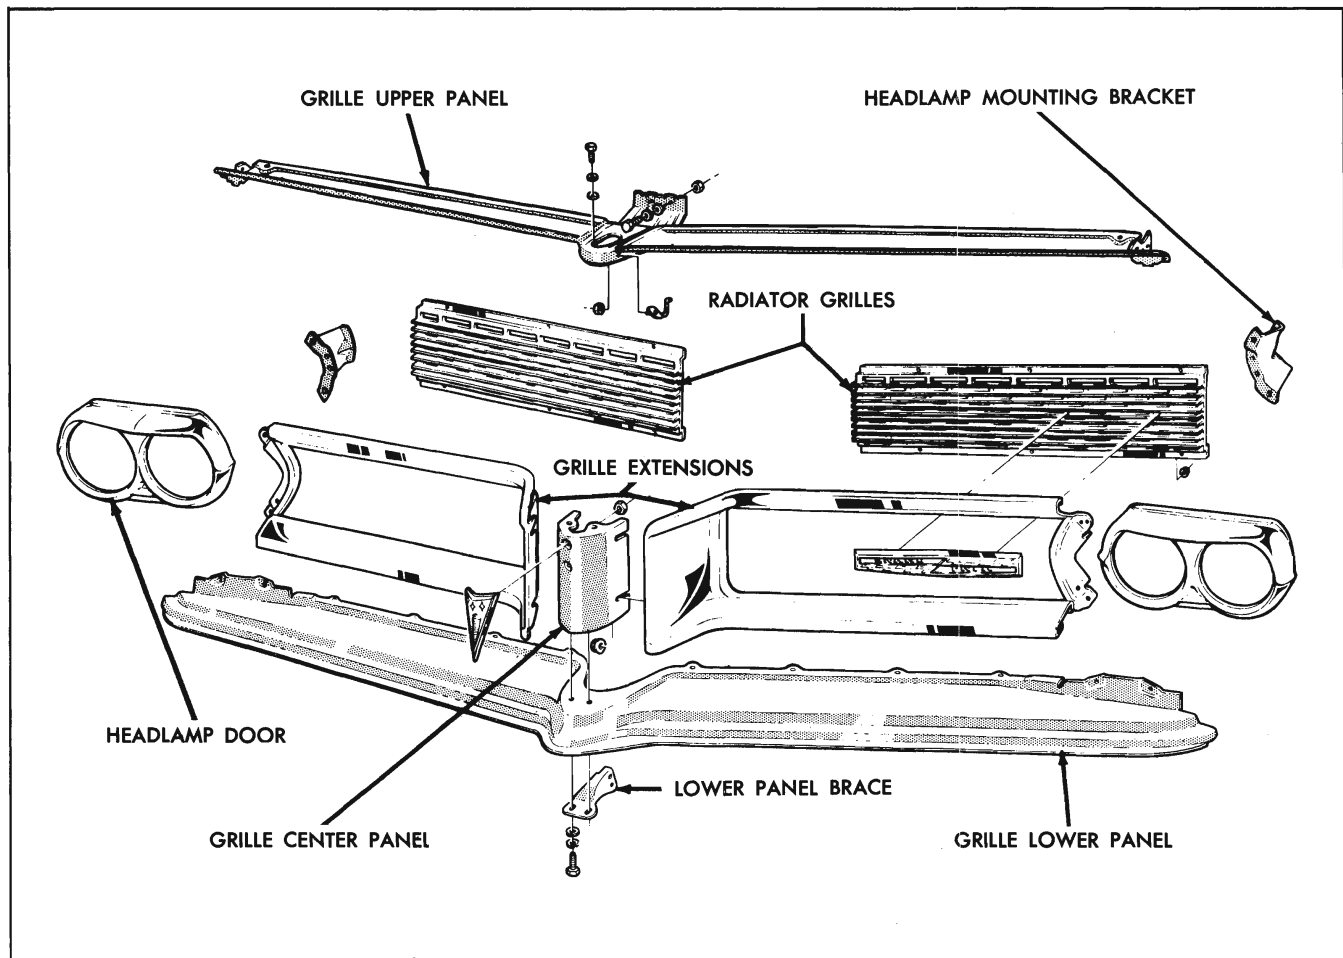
Details of Radiator Grille Assembly—Grand Prix
